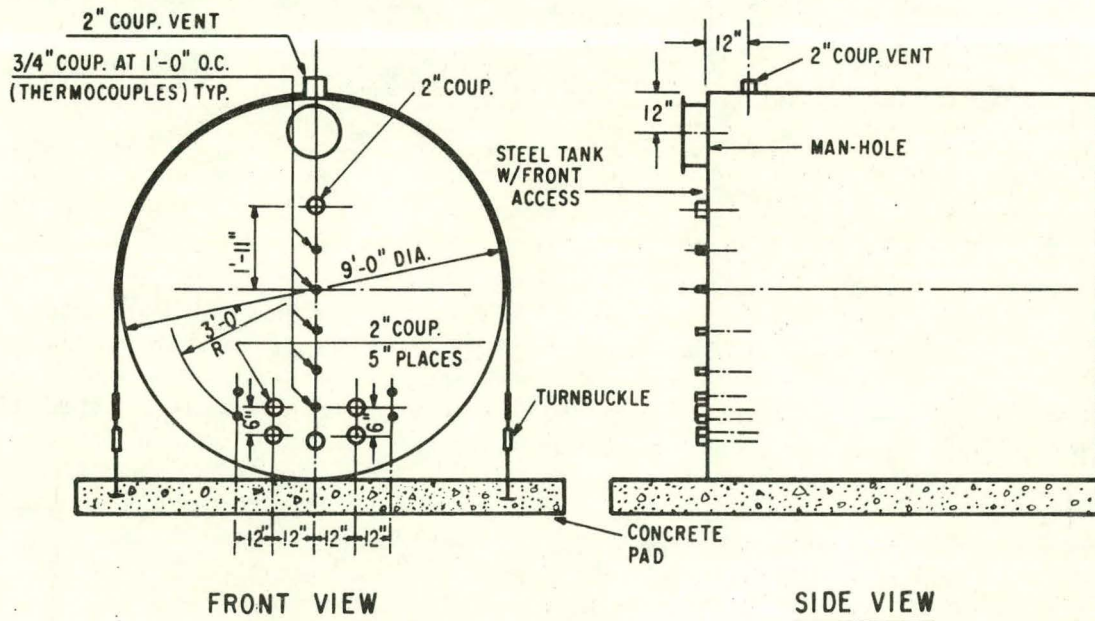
Sample Drawing of a Steel Tank 9'-6" Long x 108" O.D.
